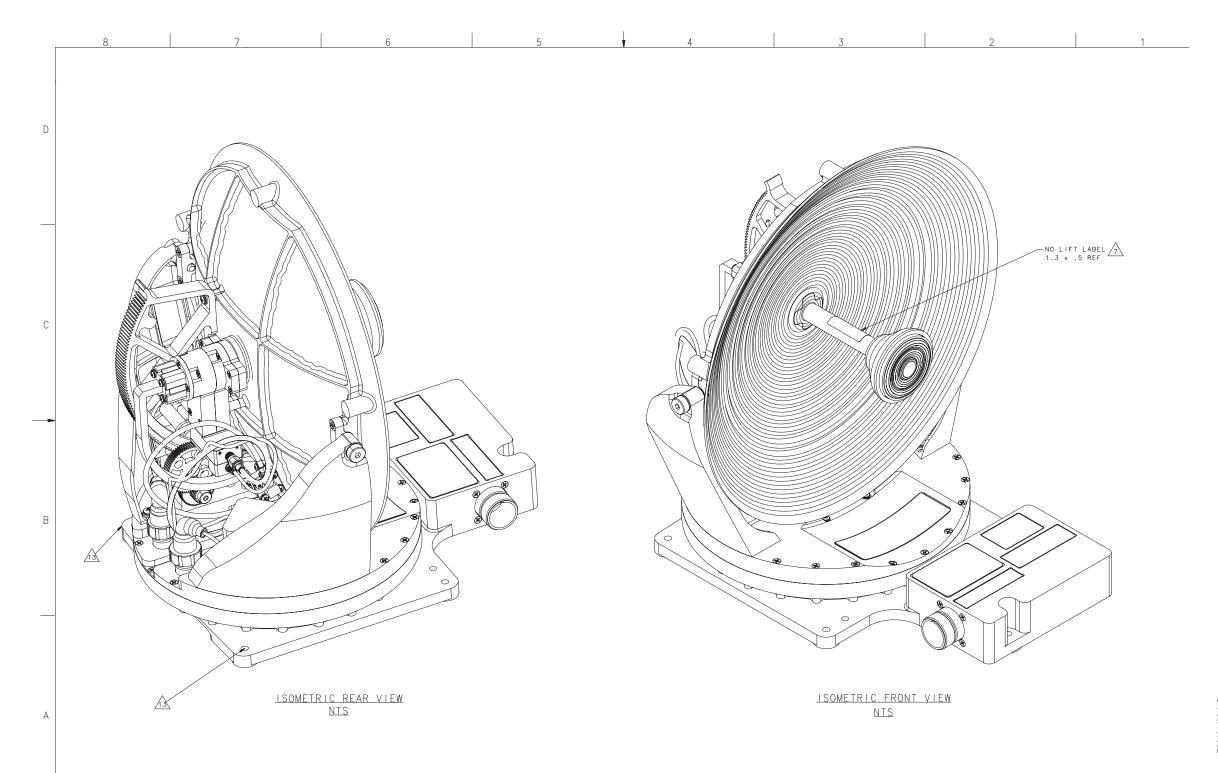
TMA Outline and Installation Drawing (Sheet 2 of 4)
